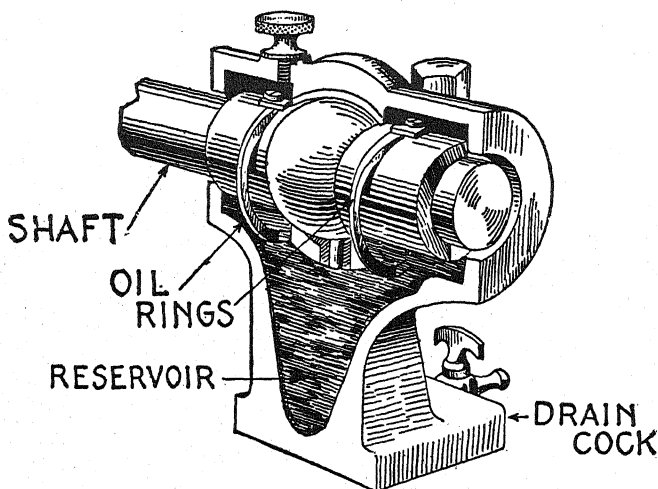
,237.—Sectional view showing a ring oiler or self-oiling bearing. As shown the pedestal or bearing standard is cored out to form a reservoir for the oil. The rings are in rolling contact with the shaft, and dip at their lower part into the oil. In operation, oil is brought up by the rings which revolve because of the frictional contacts with the shaft. The oil is in this way brought up to the top of the bearing and distributed along the shaft gradually descending by gravity to the reservoir, being thus used over and over. A drain cock is provided in the base so that the oil may be periodically removed from the reservoir and strained to remove the accumulation of foreign matter. This should be frequently done to minimize the wear of the bearing.
